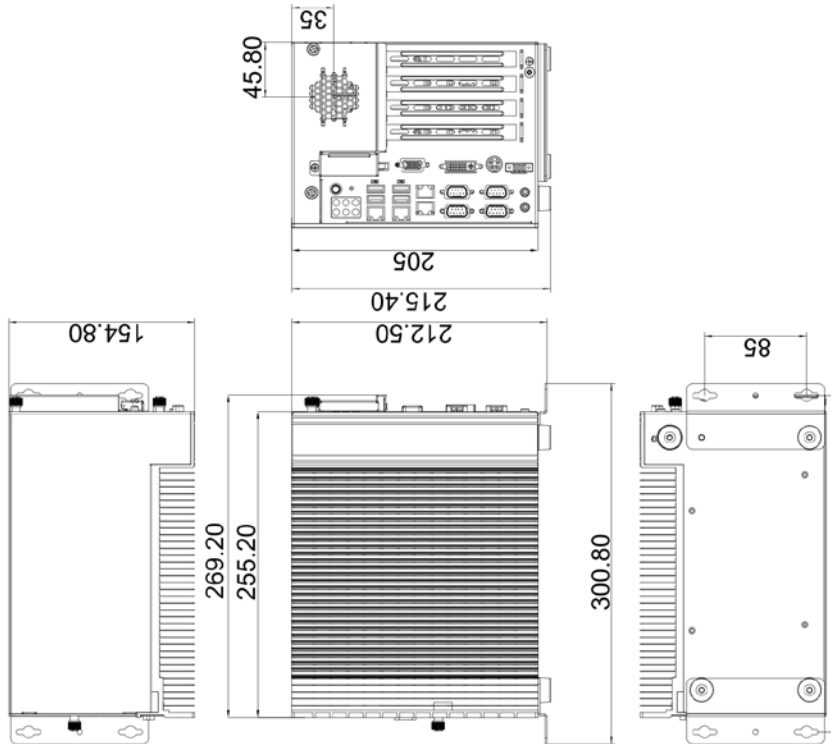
4-slot TANK-860-HM86 Physical Dimensions (millimeters)
